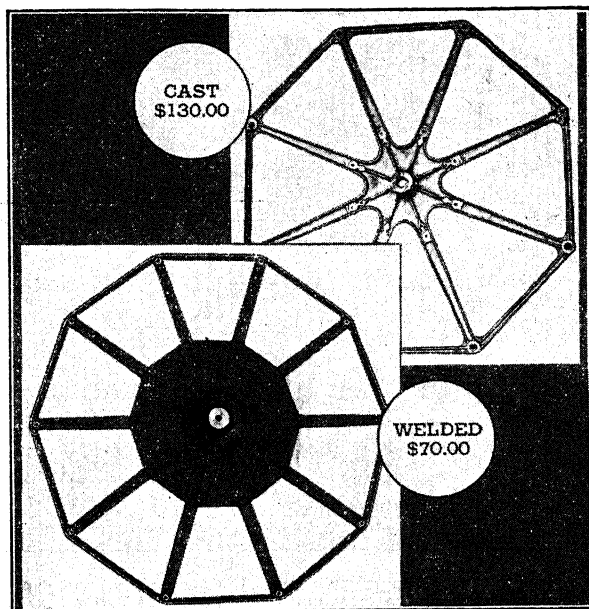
An 8-ft. spider for an oven tray conveyor. The cast steel design cost \$130, whereas the welded steel costs only \$70. Greater accuracy of alignment of bushings is also secured with the welded design, affording smoother performance.
